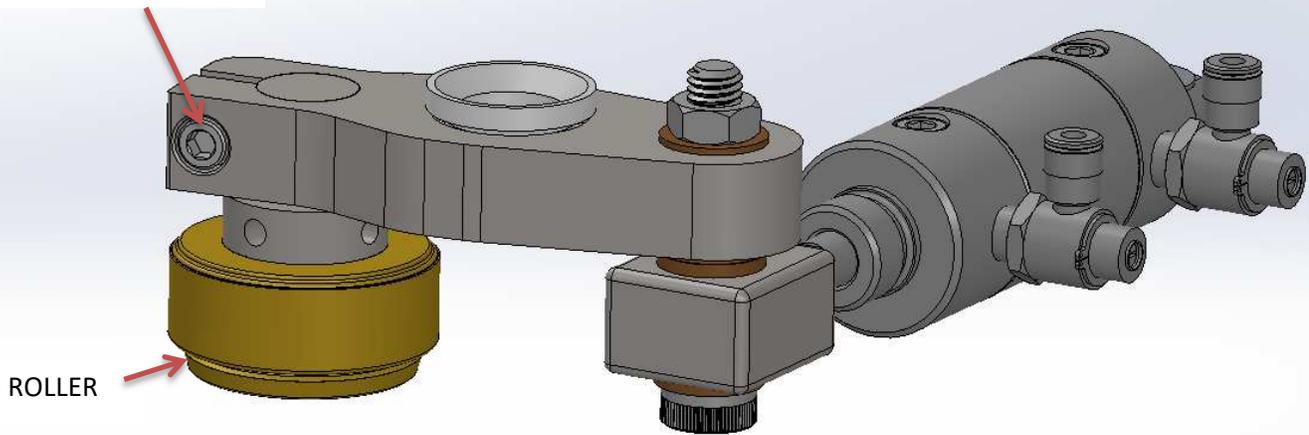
Roller Assembly. Roller height can be adjusted by loosening the socket head cap screw and turning the roller assembly in or out. The roller's position can be fixed by tightening the socket head cap screw to 14.5 ft*lbs.
